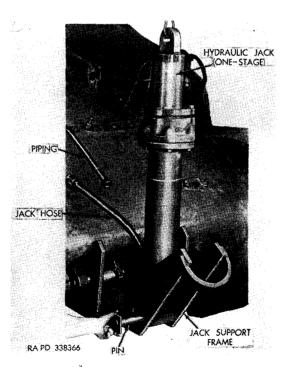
Connecting hydraulic jack to jack support frame—bulldozer M1.
